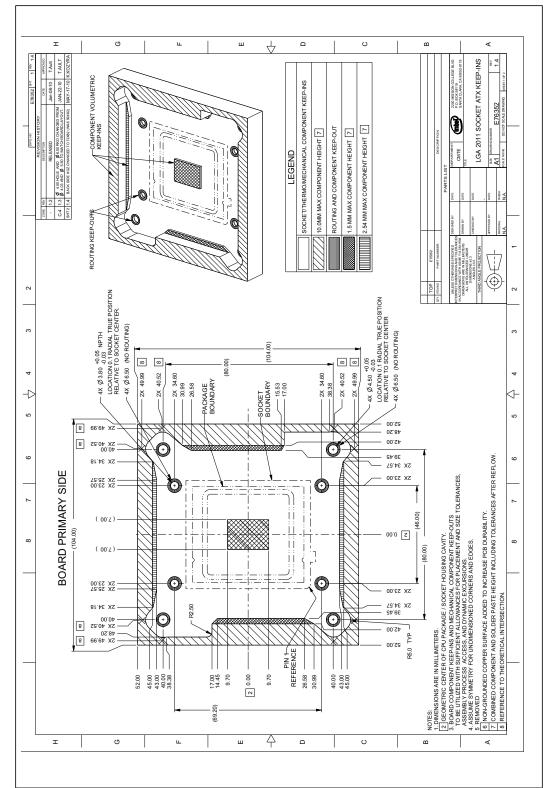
Board Keepin / Keepout Zones (Sheet 1 of 2)
